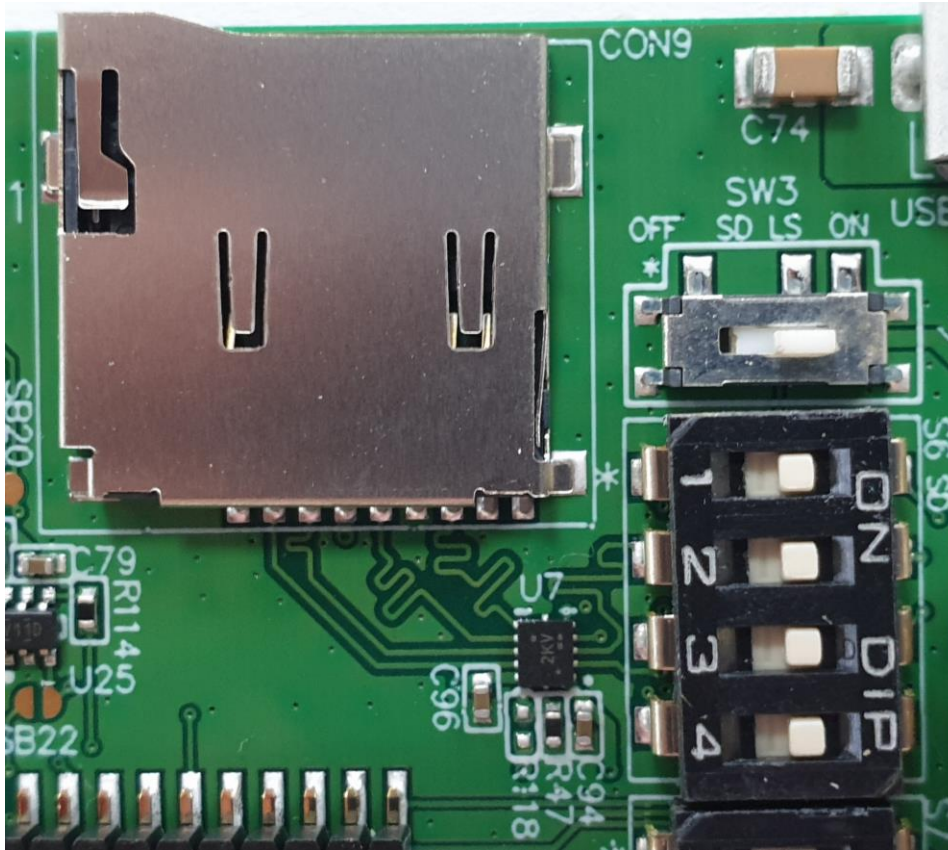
SPI device SD card holder (CON9), level shifter (U7), closed DIP switch schematic and PCB
